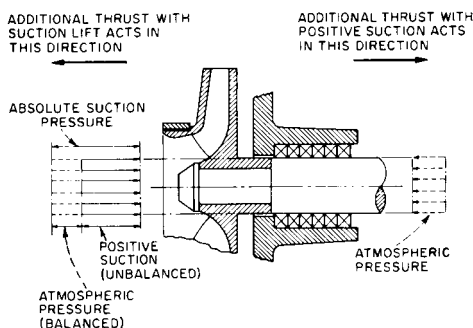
An axial thrust problem with a single-suction, overhung impeller and a single stuffing box or seal chamber
